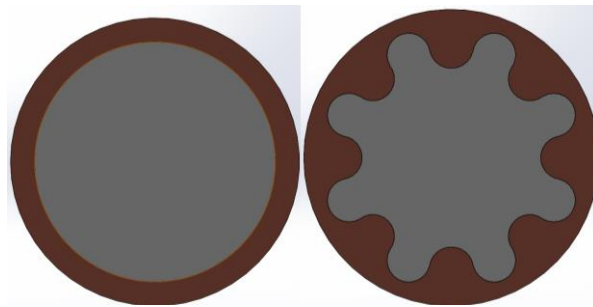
CAD drawing of an annular and sinusoidal plasma actuator
